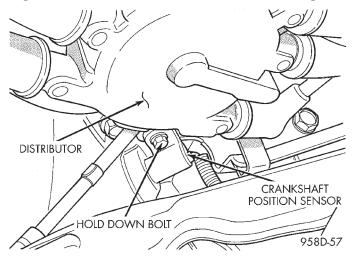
Crankshaft Position Sensor—2.5L Engine
